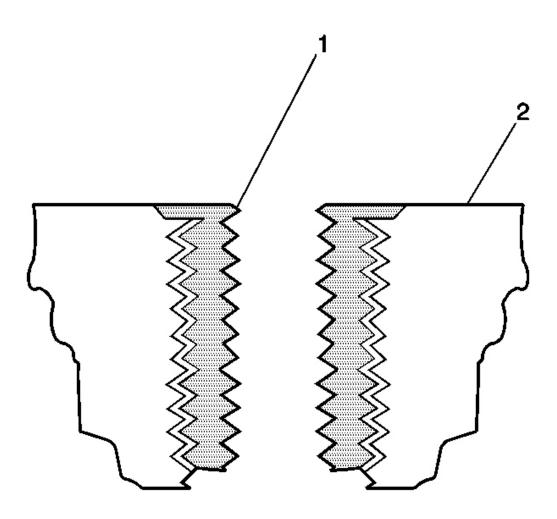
View Of Bushing Type Insert & Base Material Courtesy of GENERAL MOTORS CORP.
